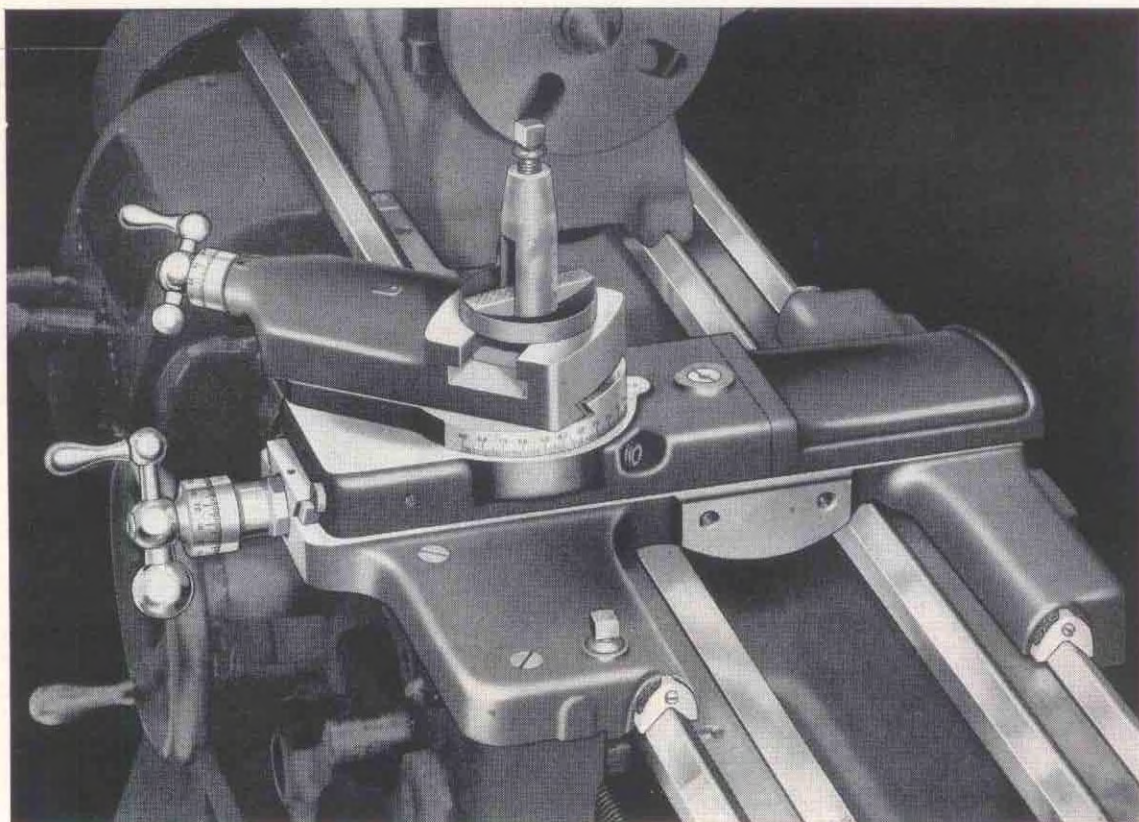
Improved Saddle and Compound Rest for South Bend Lathes
